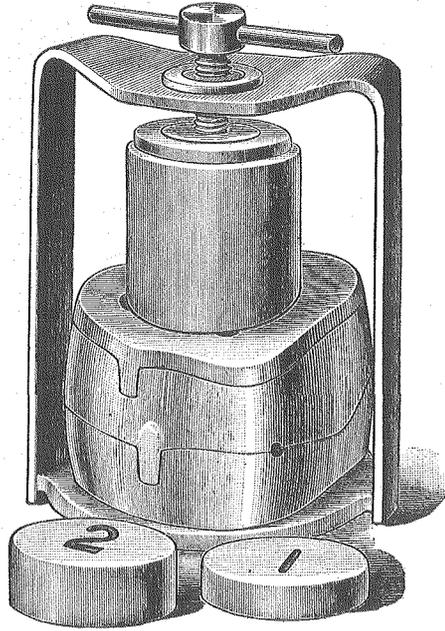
The Donham Automatic Flask Closing Spring Press for Two Flasks
